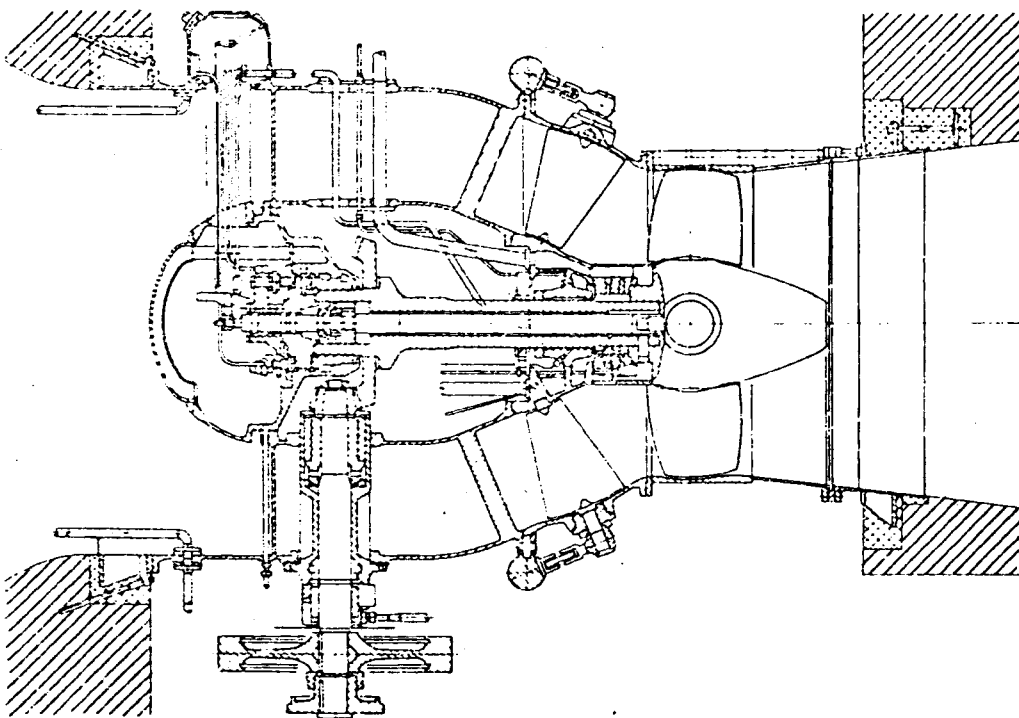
Bulb turbine with tail flange at bevel pinion drive, shaft passing through a streamlined hollow stay vane. Very small hub diameter. Gear not easily accessible and needs to be carefully adjusted under load. (Drawing courtesy Salzer Escher Wyss)
